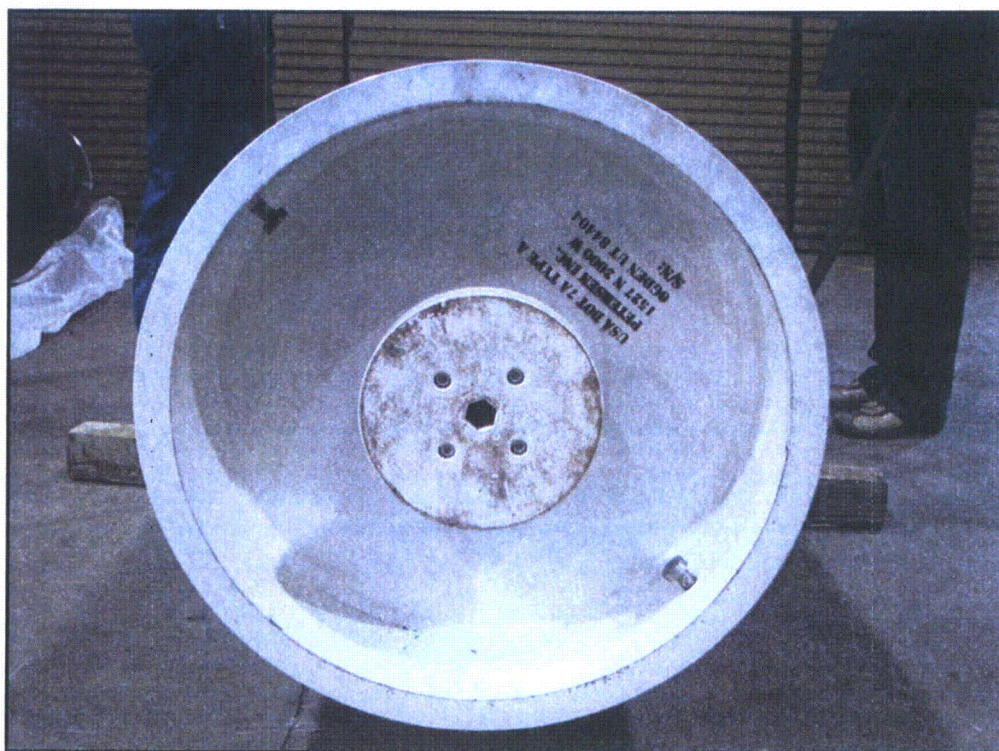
NS30 #2 Canister After Removal from End Drop Test Fixture
